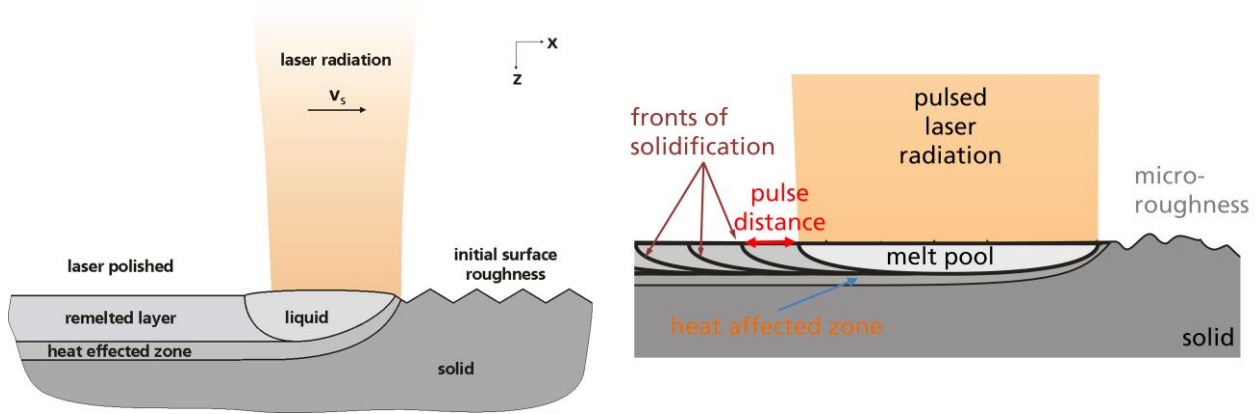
(a) Schematic of laser polishing by remelting a thin surface layer with continuous laser radiation. (b) Schematic of laser polishing by remelting a thin surface layer with pulsed laser radiation
